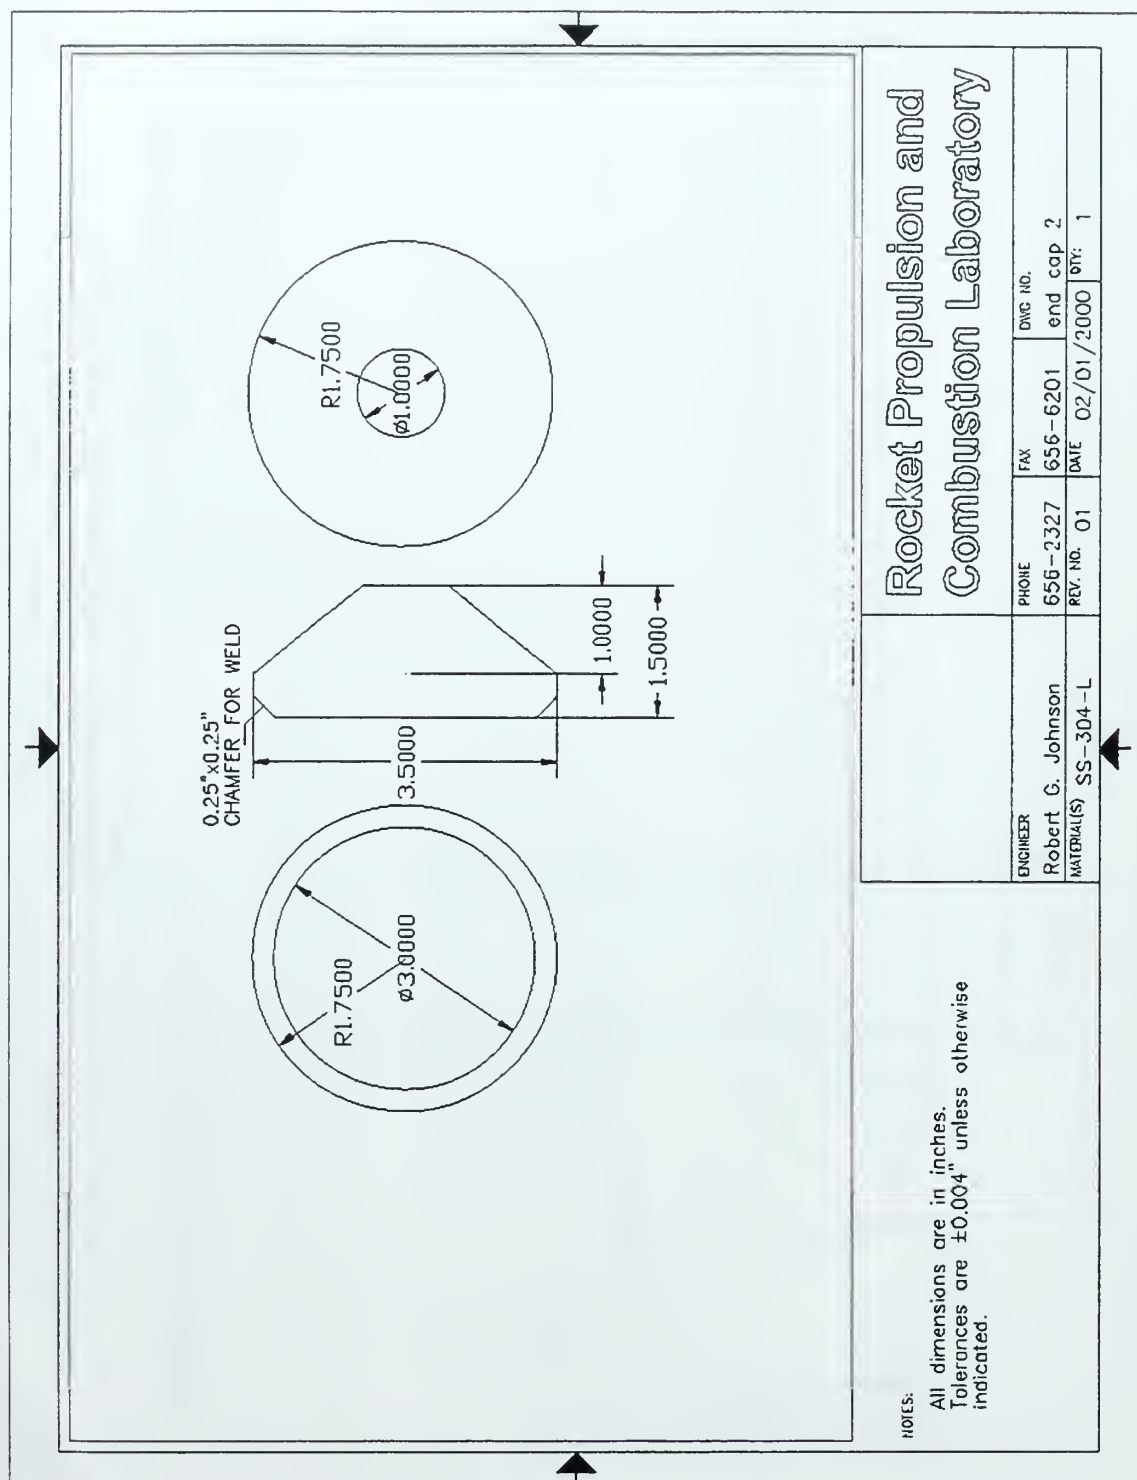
This endcap was welded to the head end of the engine. The cap was used to allow flow only in one direction and to measure thrust through its impingement on a piezoelectric load cell mounted to the thrust stand.
